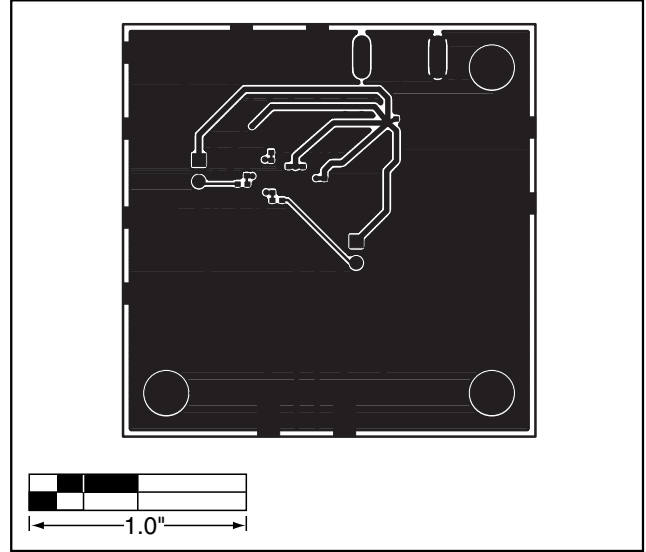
MAX2387/MAX2388/MAX2389 EV Kit PC Board Layout—Solder Side
